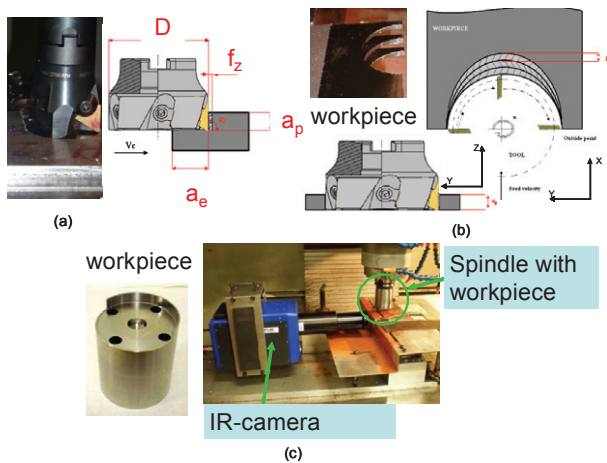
Schematics of the different machining tests- (a) single tooth face milling- (b) orthogonal milling- (c) interrupted cutting.
